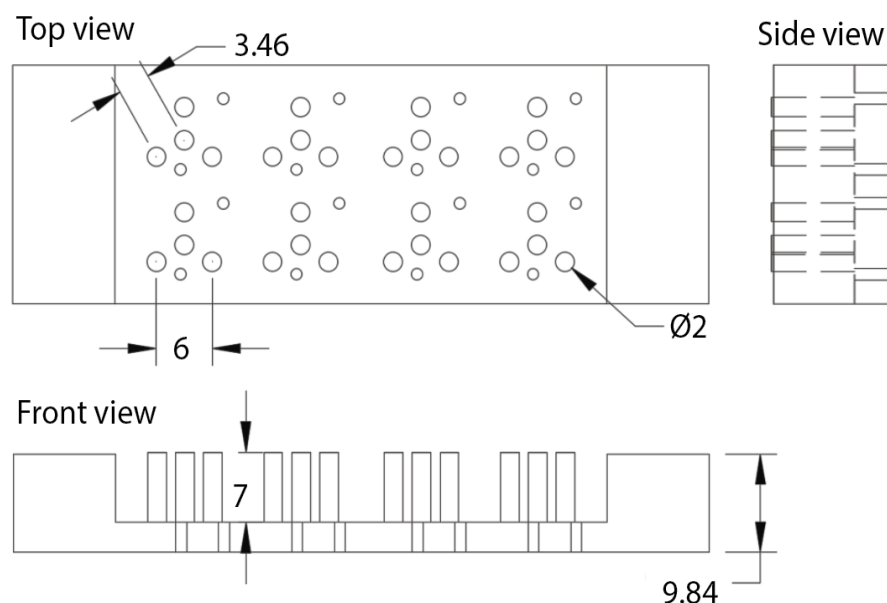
Computer-aided design of chemotaxis chamber master mold. 2-D view of top, side and front view of the master mold used to imprint the hydrogel chemotaxis chambers. Dimensions are in mm.
